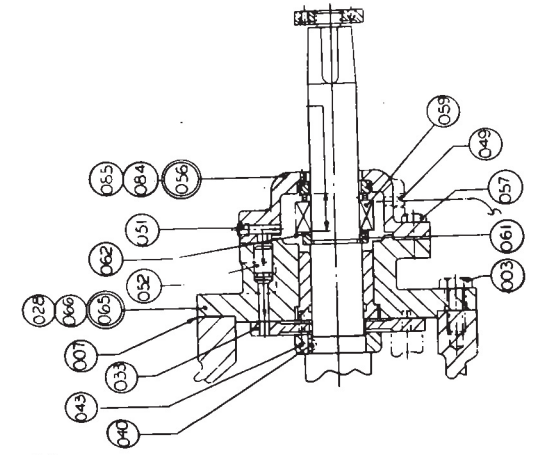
VIEW OF INBOARD END COVER SEAL WITH O-RING SEAL.
